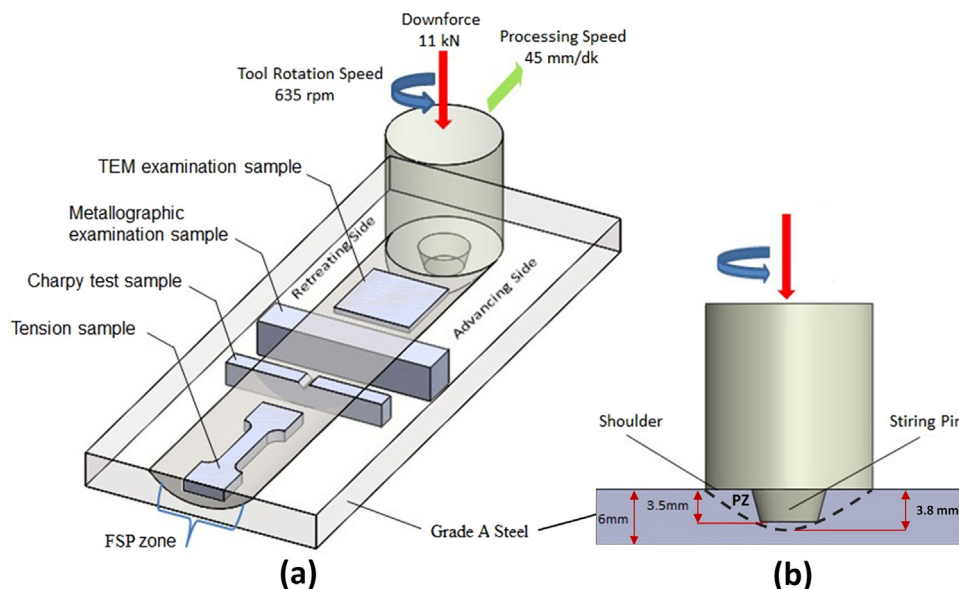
(a) Schematic illustrations of the FSPed plate and the sample geometries machined from that plate. (b) Cross-sectional view of the plate showing the WC tool's position with the geometrical parameters.
